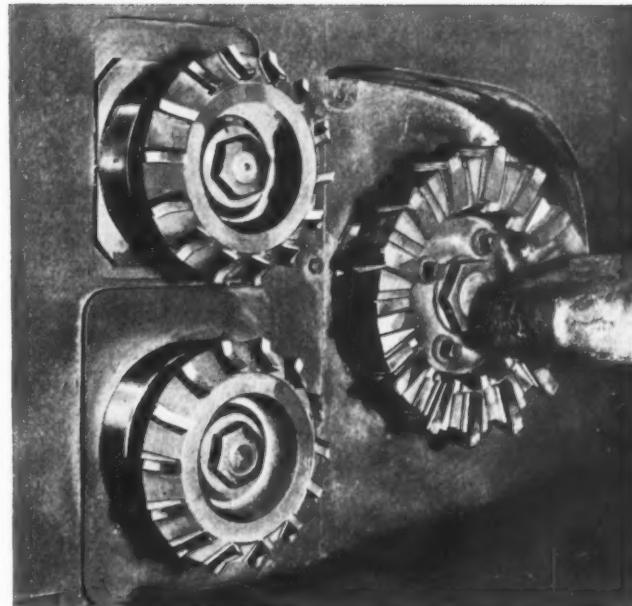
Special Cutters Used in Scalping Copper Billets from which Wire is Drawn
